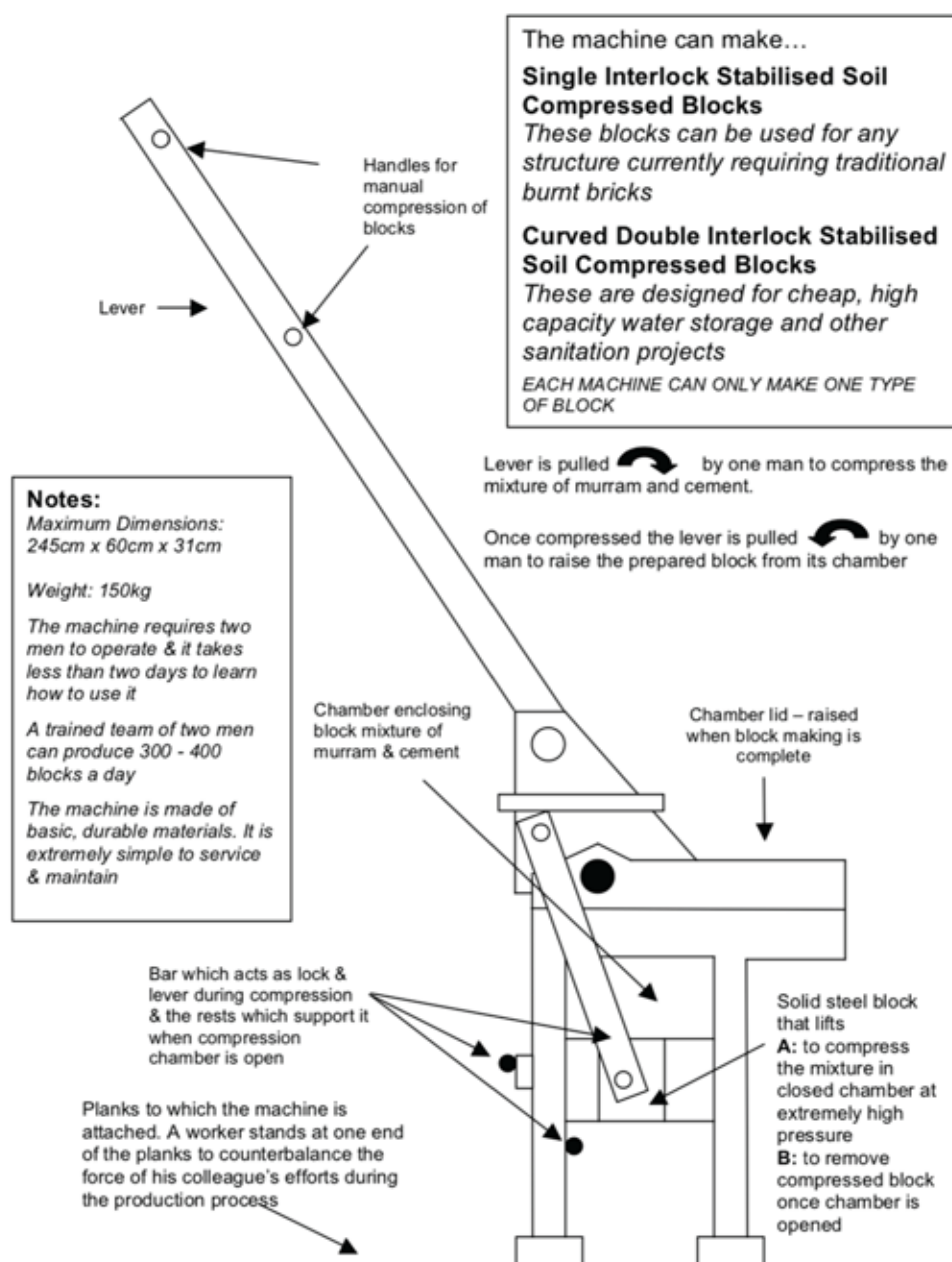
Drawing of the CEB machine used by C-re-aid NGO
